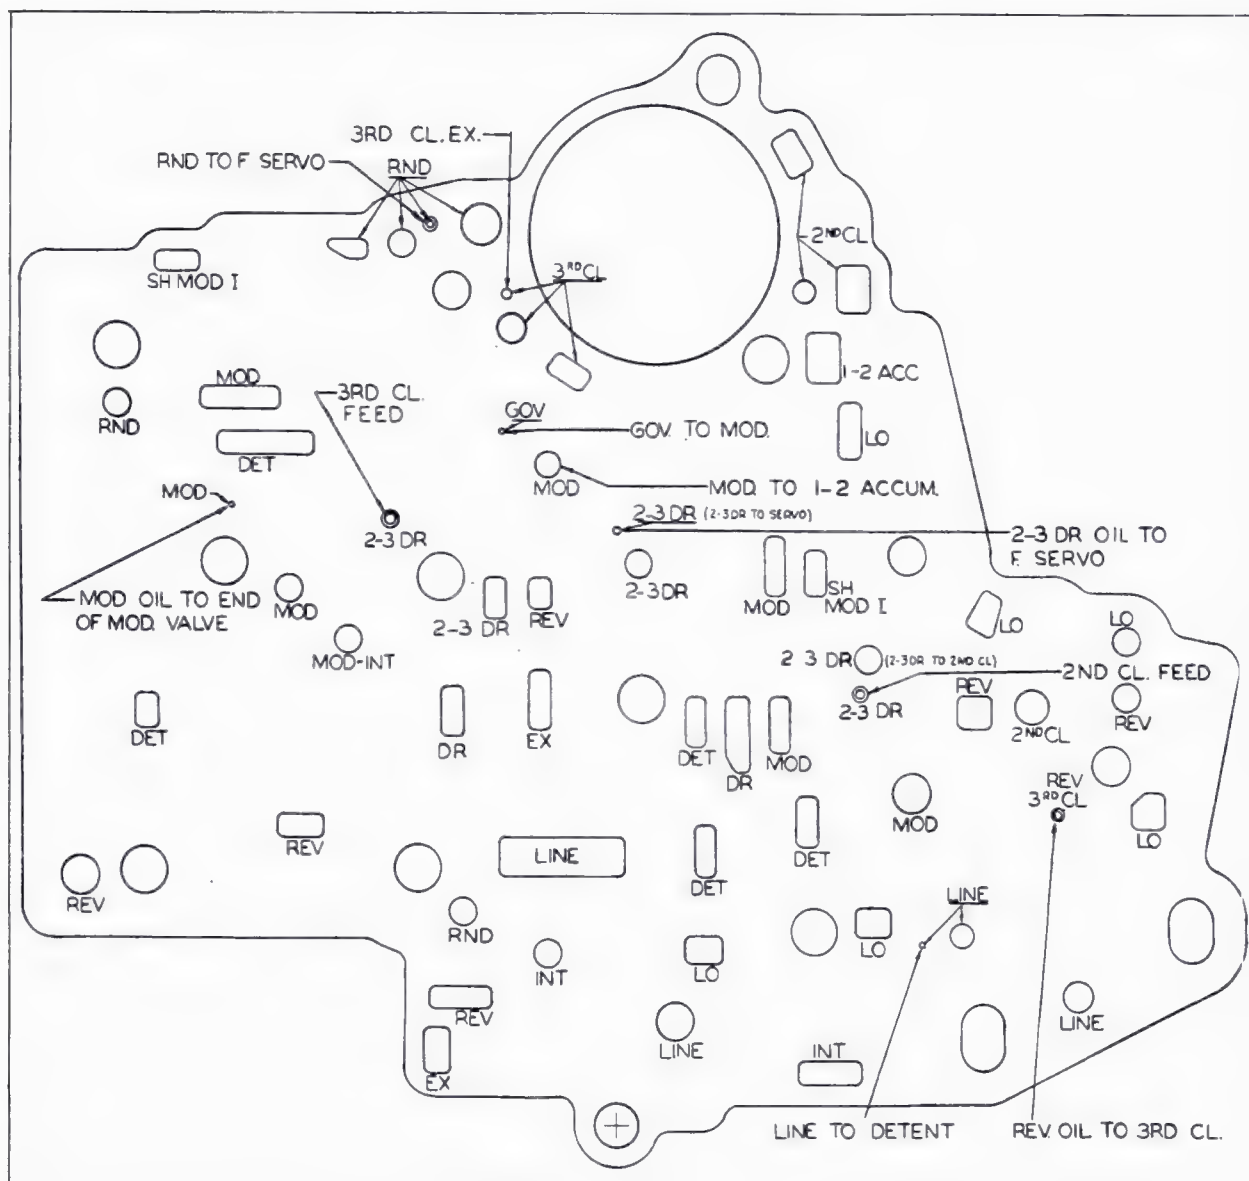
AA and AB Spacer for Control Valve Assembly
